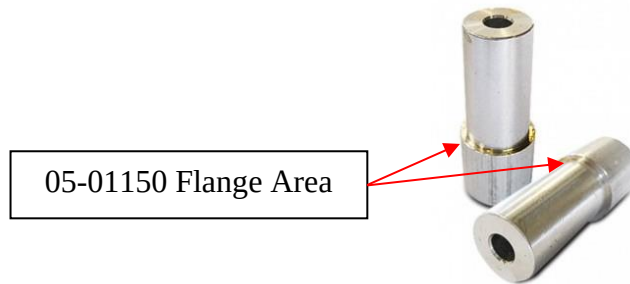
05-01150 THREADED ROD END INSERT
